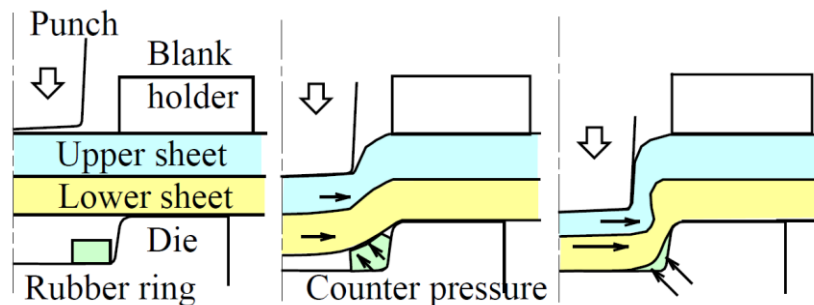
Scheme drawing showing the rubber counter pressure ring [26].
